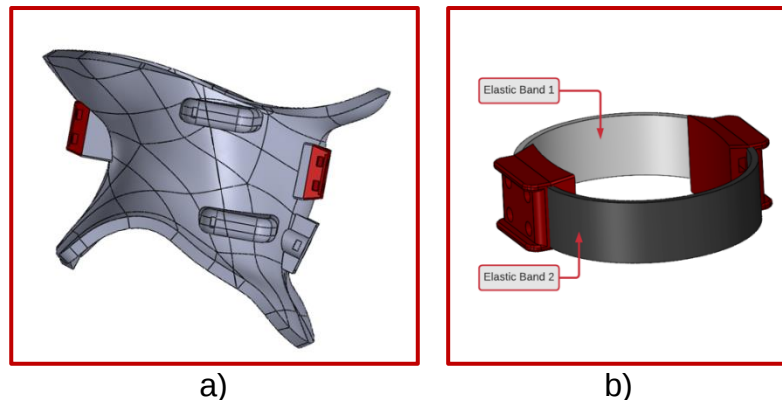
Double Figure of the 2 solid components assembled to the Collar: a) Lateral View of the assembly of both solid components; b) Overall View of the entire Elastic Band System.
